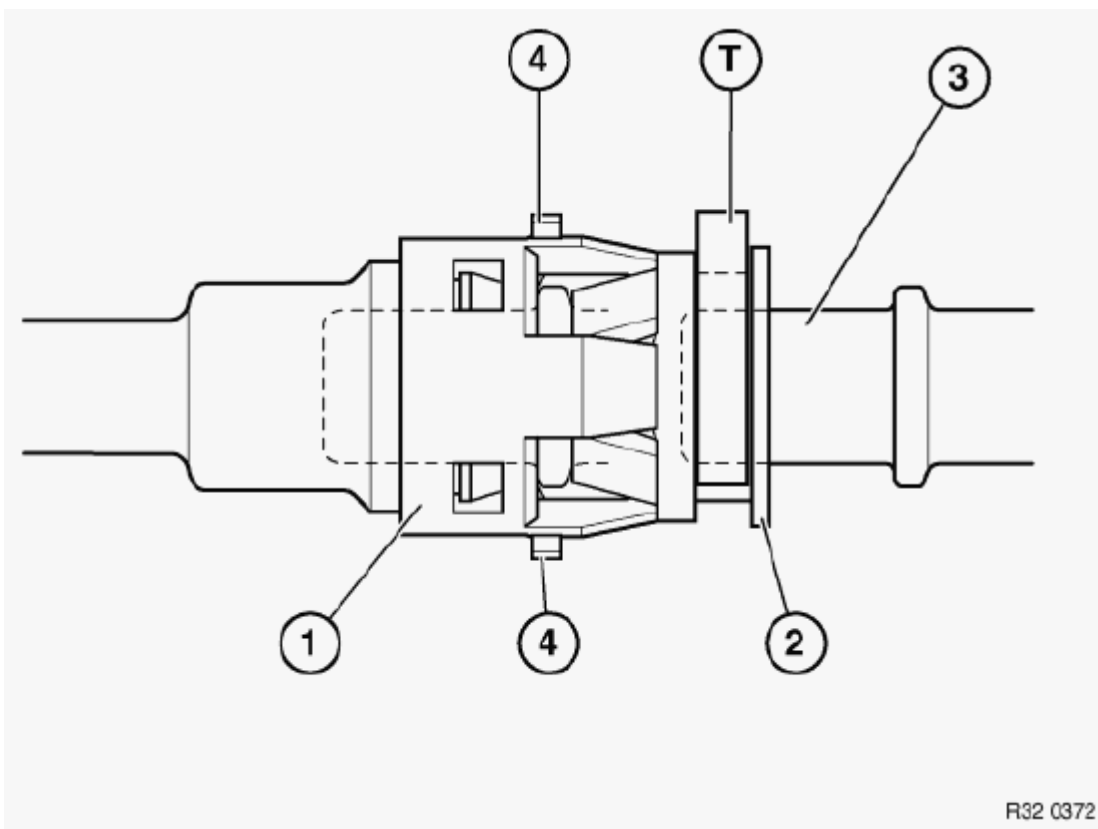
Quick-Connect Coupling Component With Indication Pins
